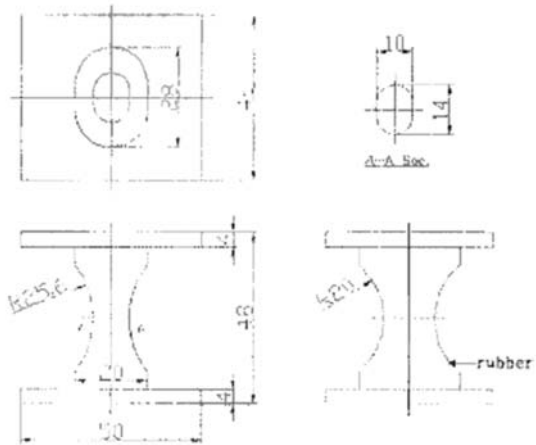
Hourglass-shaped fatigue test specimen design by Takeuchi et al. (1993)
